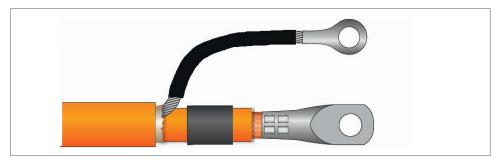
Step 6 (HV BM 1.2+S, HV-): Attaching and crimping the ring terminals
